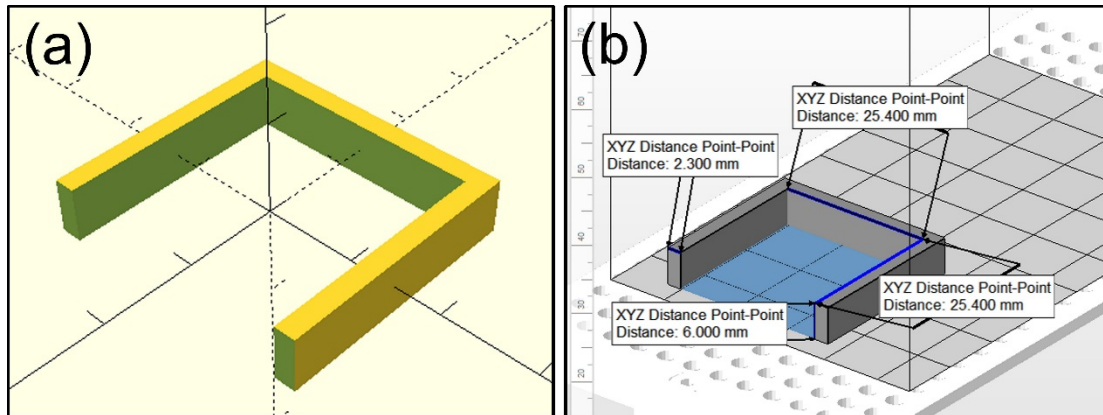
The mold of wax spacer. (a) The original prototype designed in OpenSCAD; (b) The mold size of wax spacer.
